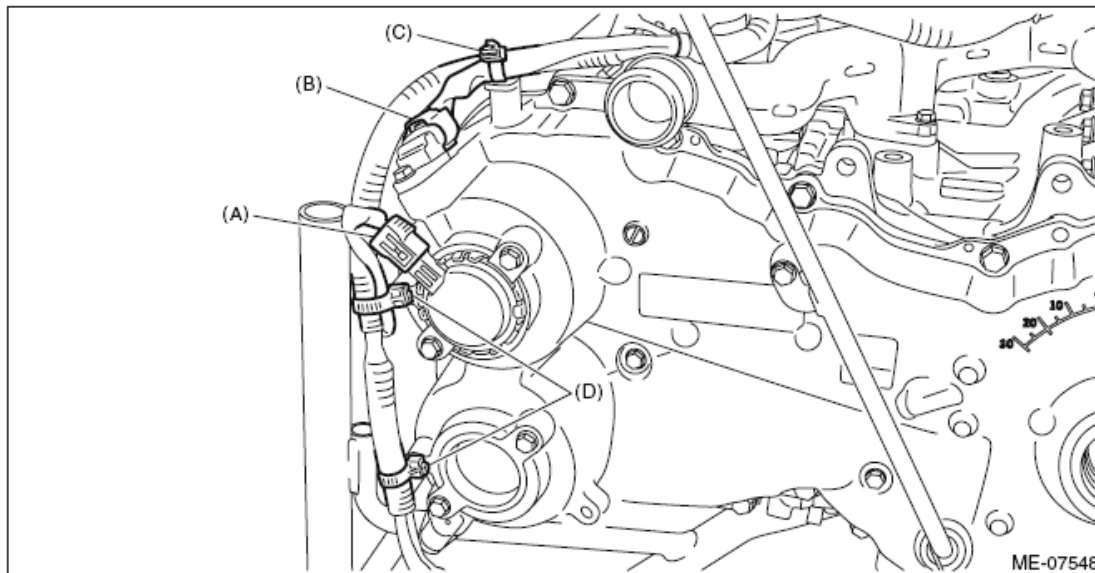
Identifying Oil Control Solenoid Connector And Clips
